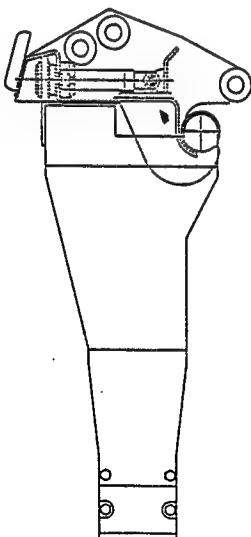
Quick-Connect Coupler and Adapter on Hydraulic Hammer With Locking Pin Retracted
